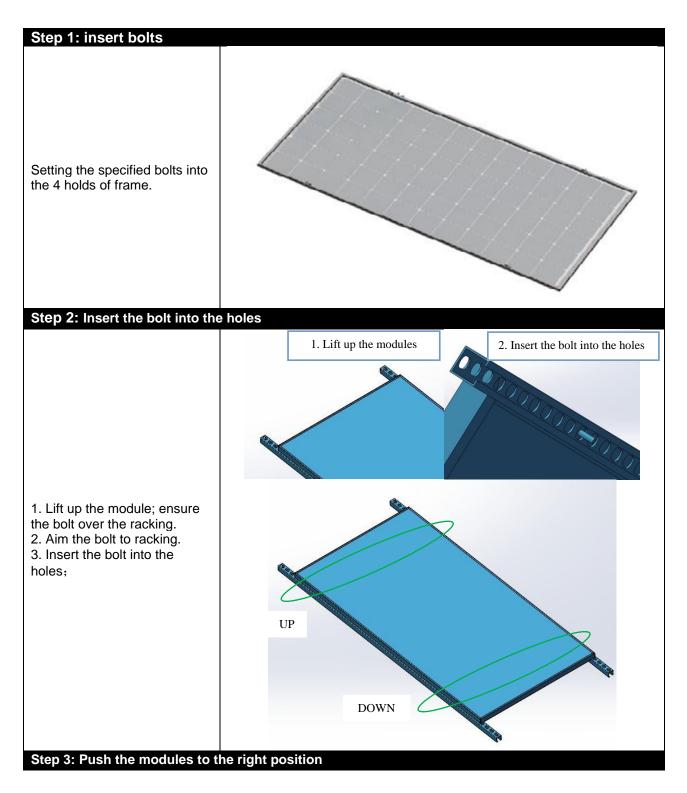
PV module installed with Bolt fitting method 2) M8 Stainless Bolt
